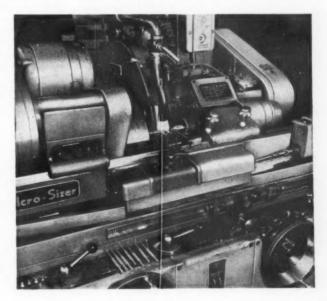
Churchill Fulcro-Sizer cylindrical grinder installed for handling a variety of shaft components
